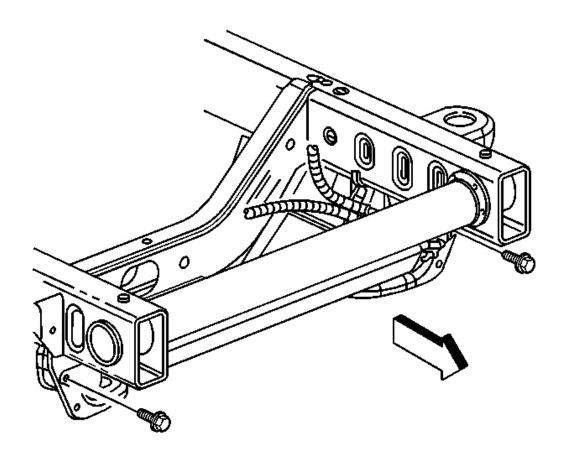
Removing/Installing Power Steering Cooler Mounting Bolts Courtesy of GENERAL MOTORS CORP.
